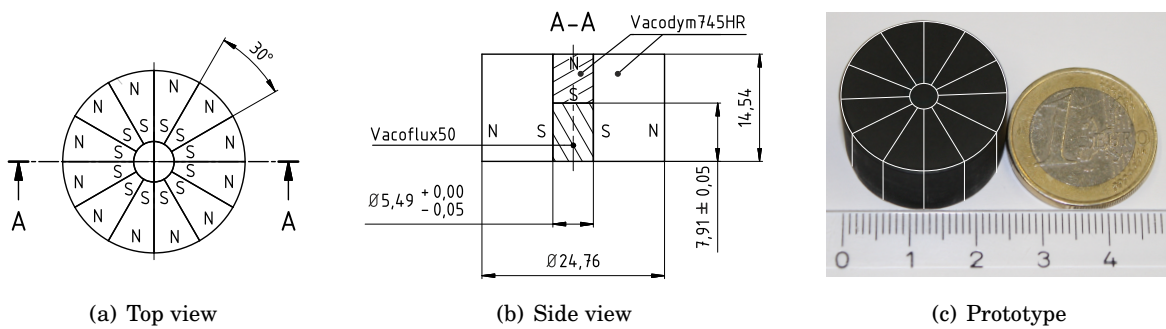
Geometry of the HCp-prototype manufactured by the company Vacuumschmelze Hanau GmbH & Co. KG (www.vacuumschmelze.de).
